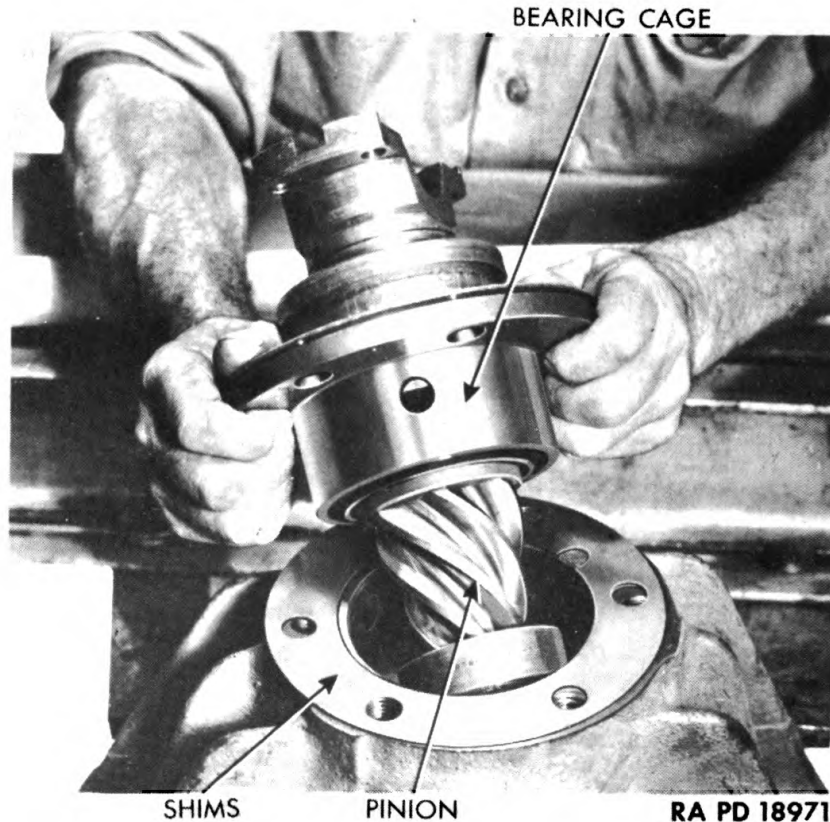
Removing Bevel Drive Pinion Cage Assembly
